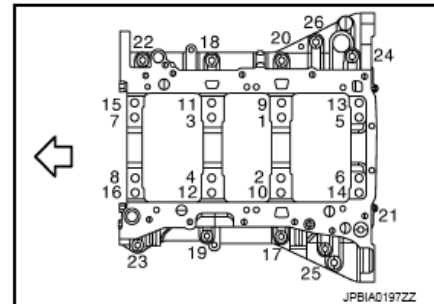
Identifying Lower Cylinder Block Bolts Tightening Sequence
